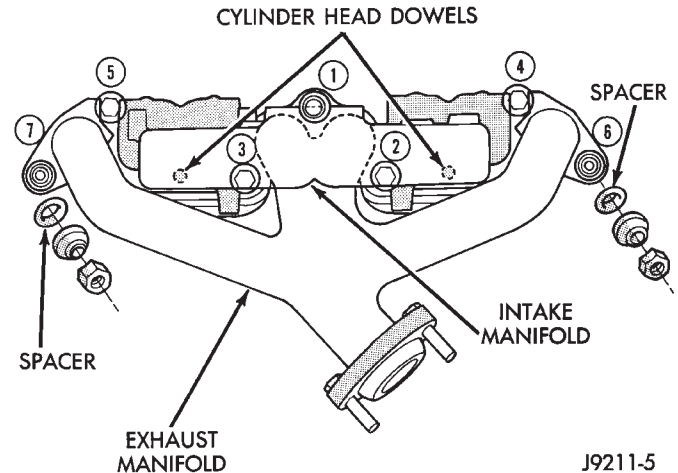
Intake/Exhaust Manifold Removal/Installation INSPECTION
